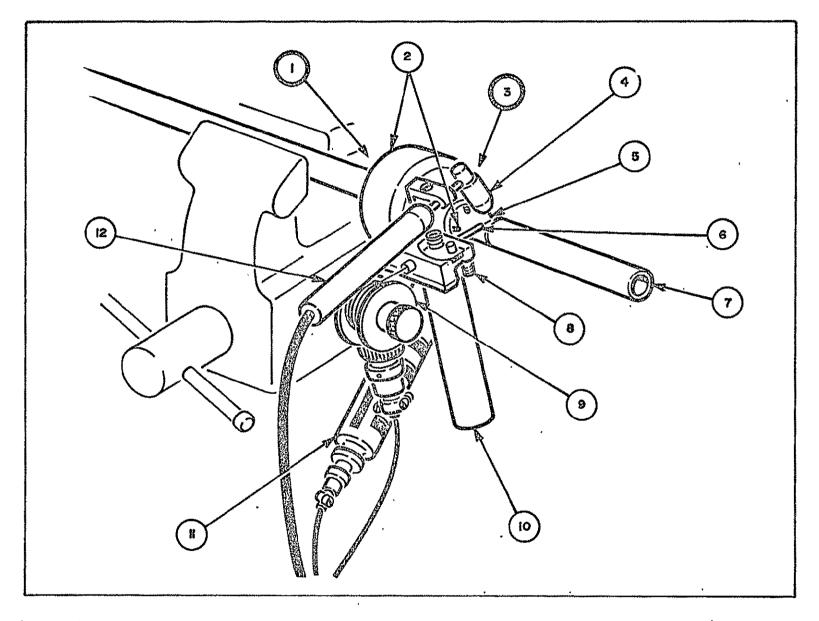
Small Carriage and Torch Assembly - Controls and Functions. (Sheet 1 of 2)
